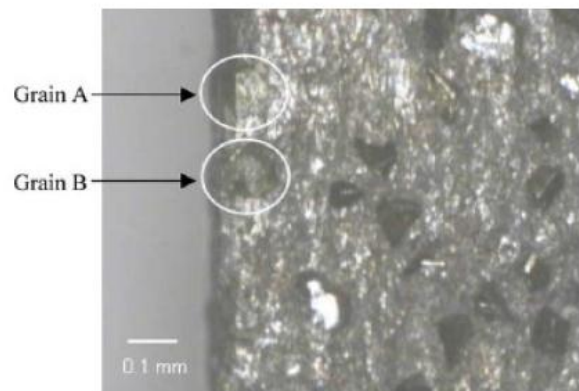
Tool lateral face before drilling test on SiC. Grains A and B were dislodged after 16 drilling tests .
